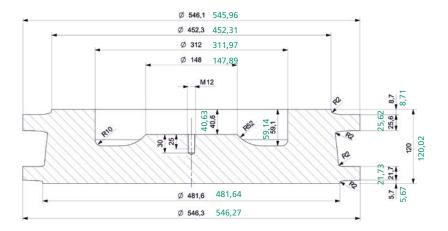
Achieved tolerances when machining the demonstrator by simultaneous three axis turning.
